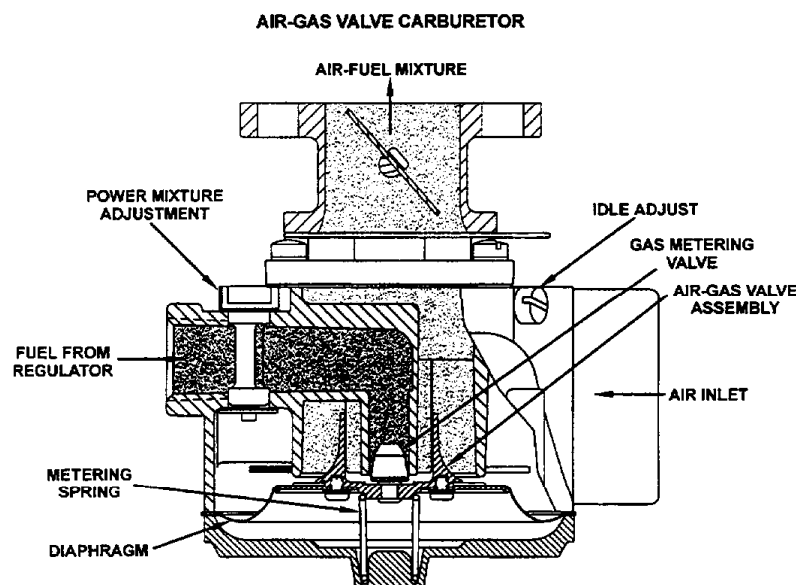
AIR-GAS VALVE CARBURETION SYSTEM
